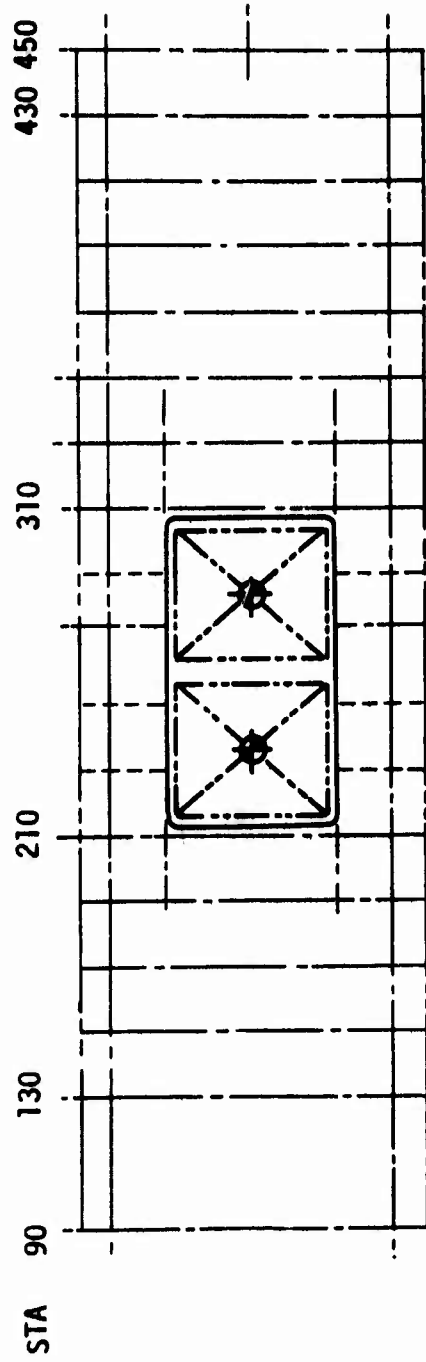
(U) Structural Arrangement for Single Row of Two 40 x 48 Cargo Pallet Exits.
